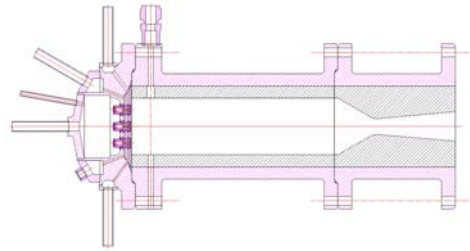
Section View of Assembled Part for Validation Combustion Test
